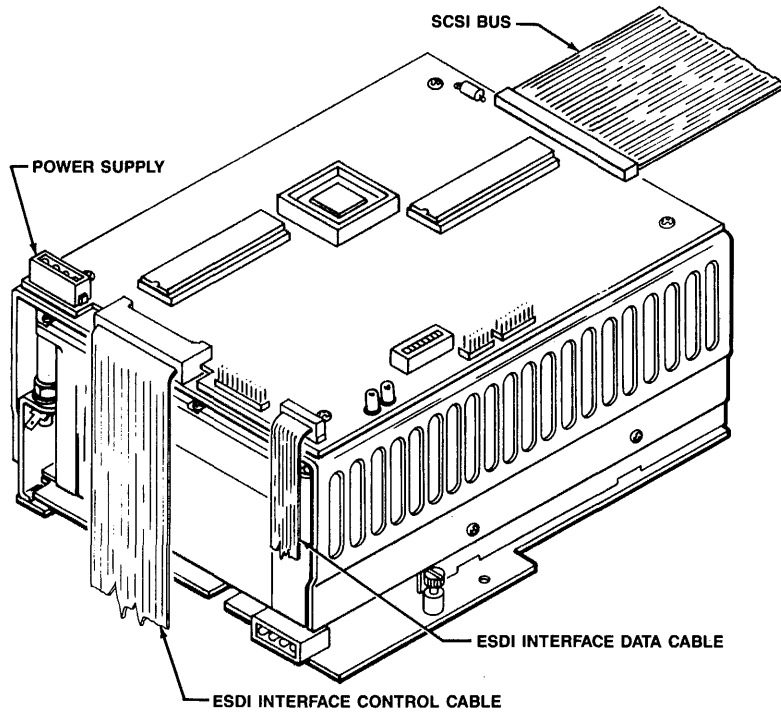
Connecting the Disk Drive Data and Control Cables and the SCSI bus to the MD21 Controller
